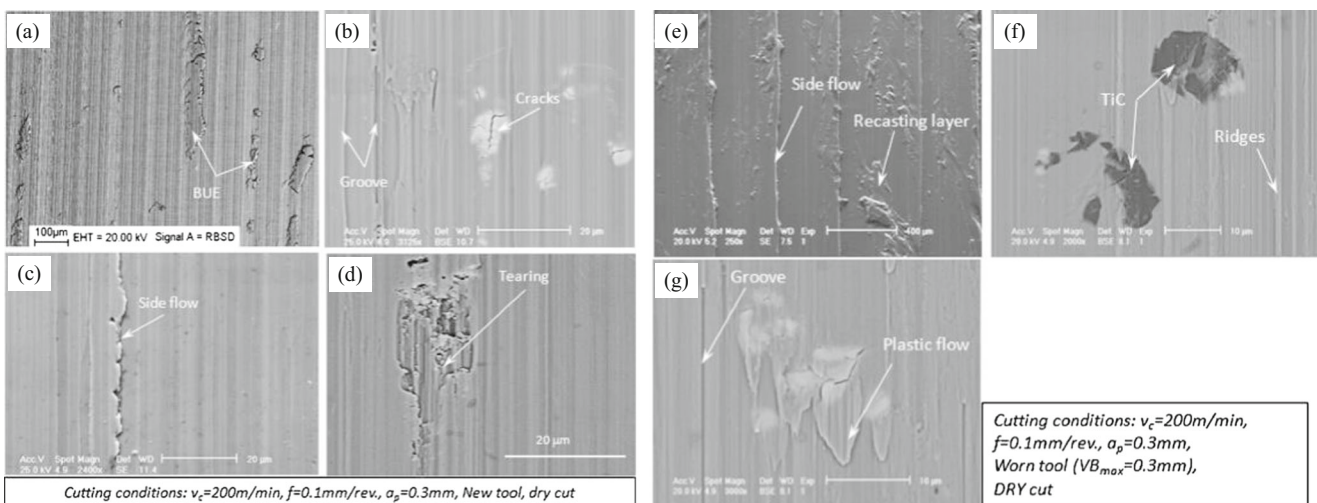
Machined surface defects of Inconel 718 generated with (a–d) new tools and (e–g) worn tools [134]
